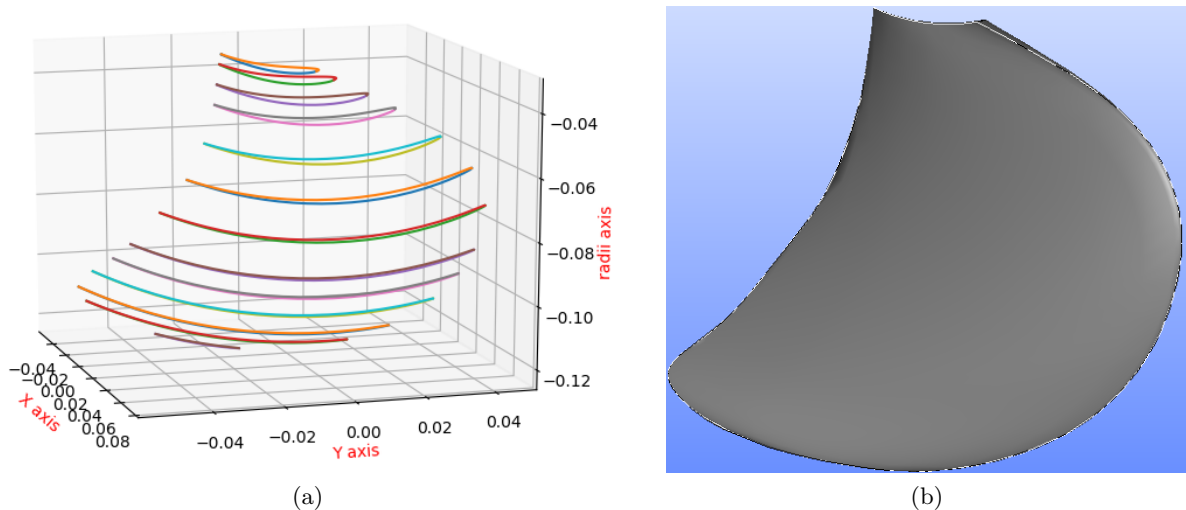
PPTC blade bottom-up construction with BladeX: (a) Cylindrical blade sections in their final three dimensional position. (b) The generated CAD surface (saved in *iges* file format).
